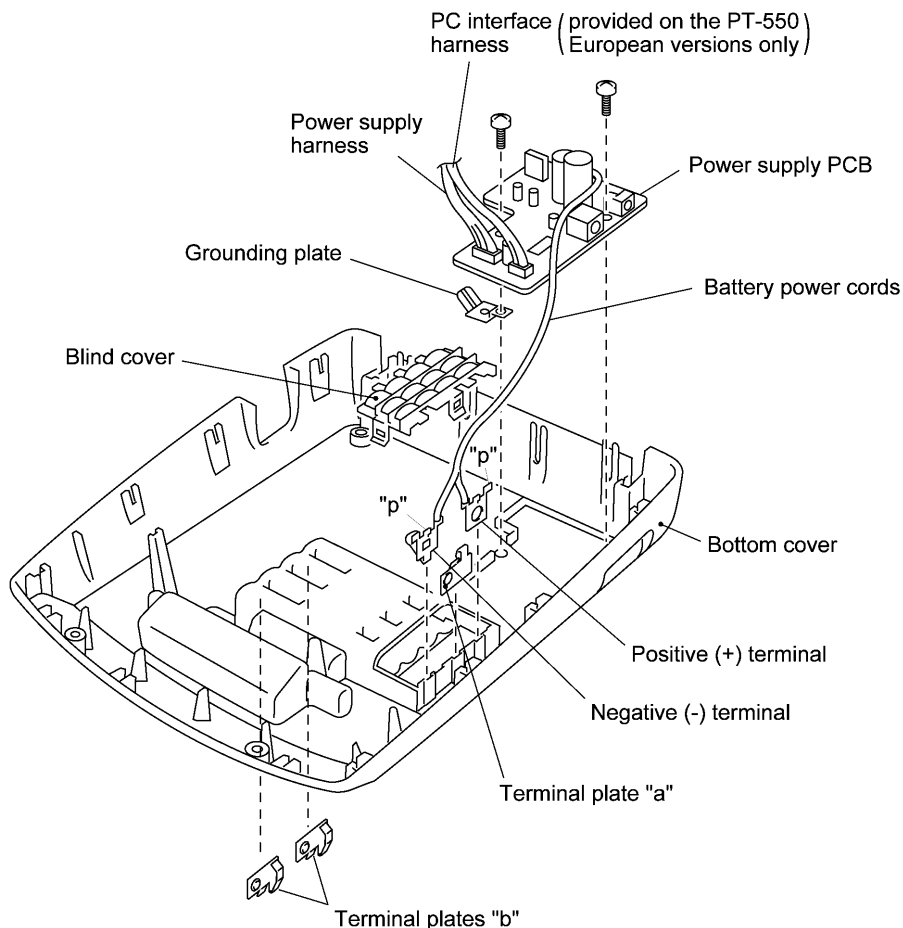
Installing the Terminal Plates, Power Supply PCB, and Blind Cover
